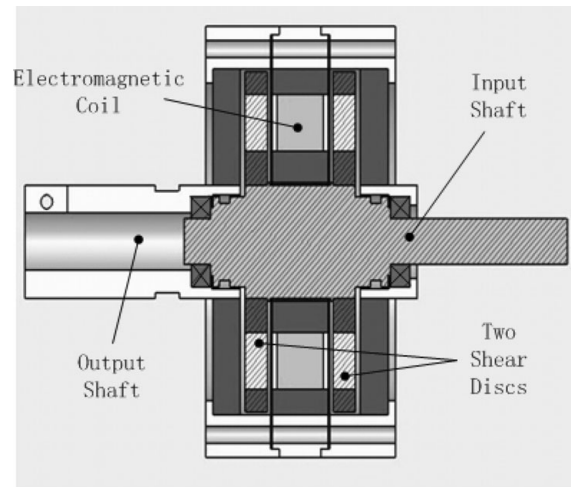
A cross-sectional view of the MR fluid brake prototype.
